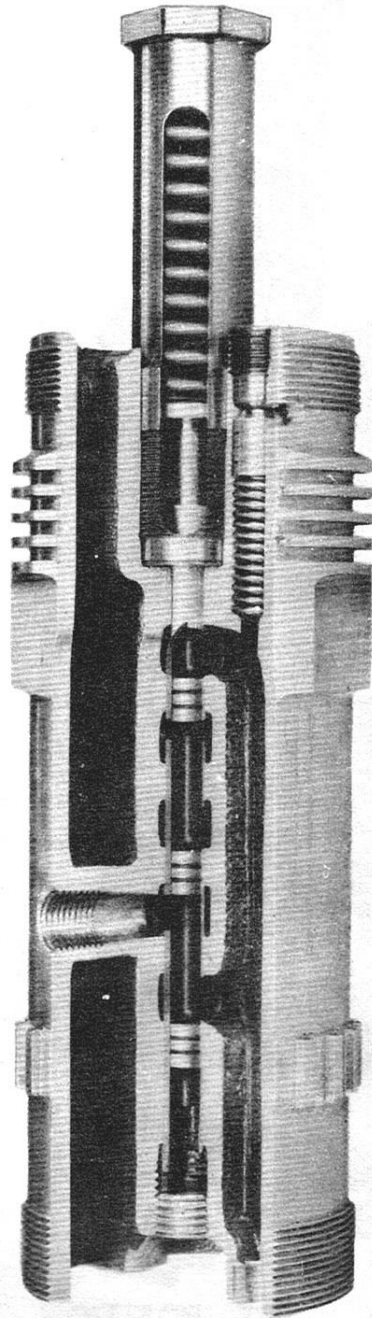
DISTRIBUTOR VALVE POSITION (UNFEATHERING)
